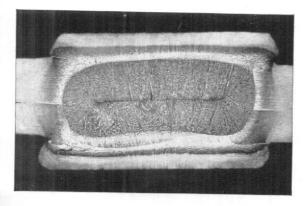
Example of a hot-formed rivet showing the type of defects to avoid; enlarged.
